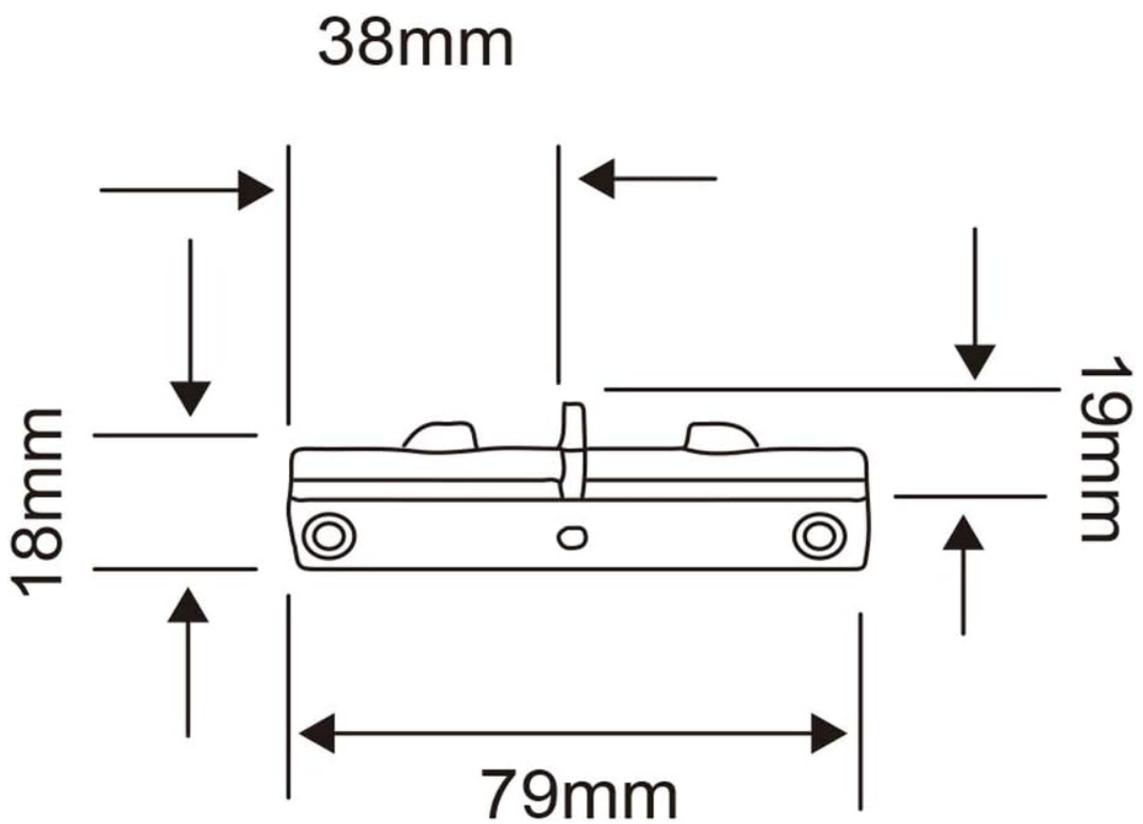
Technical drawing providing precise dimensions of the YS-I/N straight connector.
